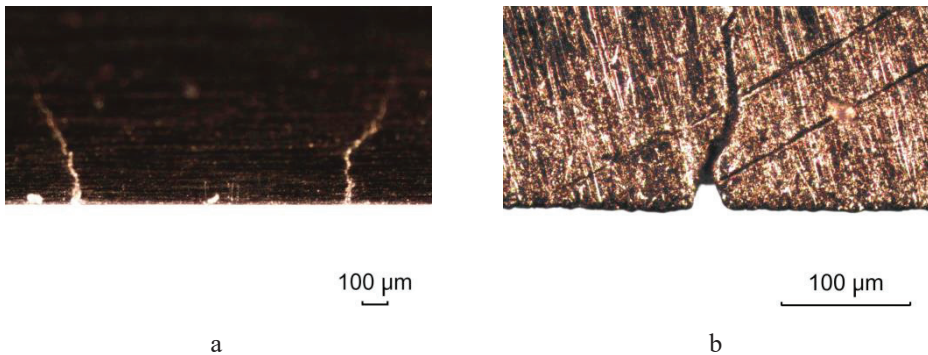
Cracks and gaps in the tool's cutting edge ($u_z = 1.00$ mm, $L = 800$ m): a – cutting edge cracks on the rear surface; b – cutting edge crumbling on the frontal surface
